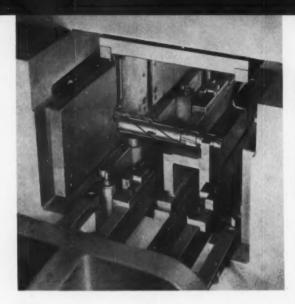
The probes shown in Figs. 1 and 2 test space within the block for this camshaft boring-bar support. After the block is in position, the boring-bar feeds out and is supported on pillows.
